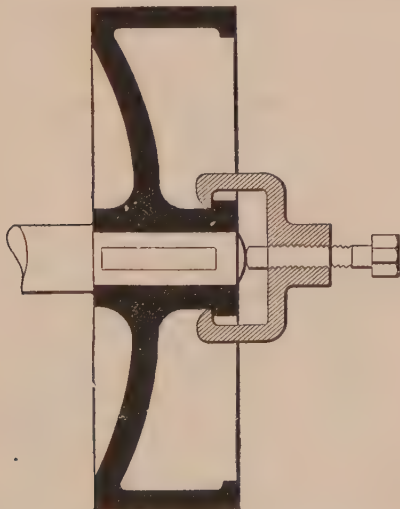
Method of withdrawing fly wheel from crank shaft and the tool used for the purpose.
